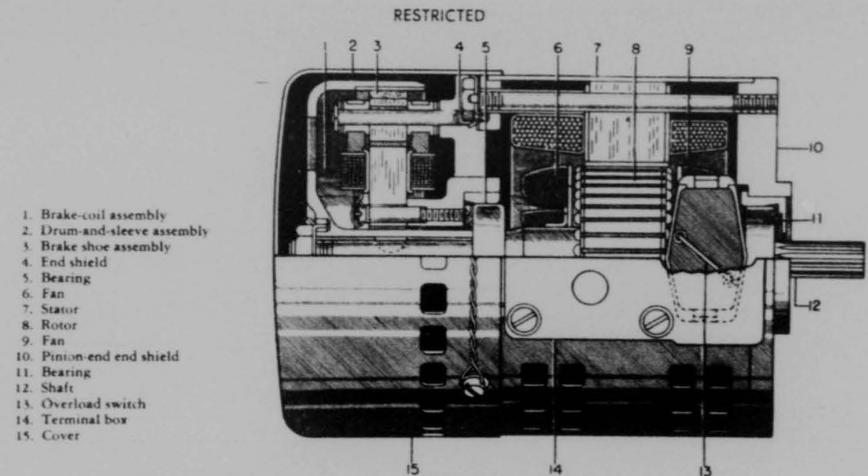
Cutaway View of Motor Model 5K40BJ22.
